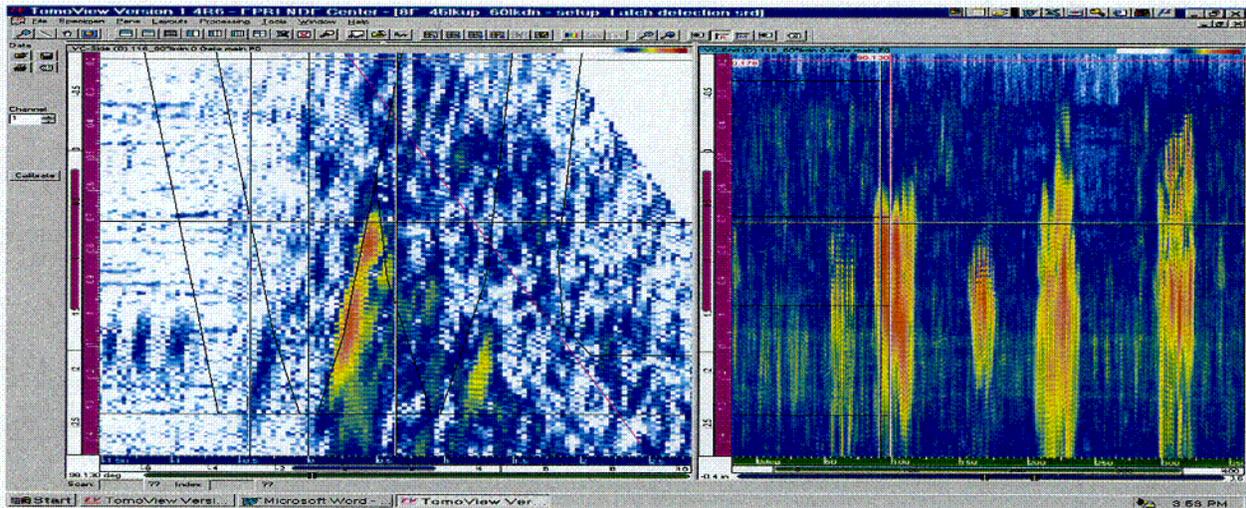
Ultrasonic indication of fatigue crack Flaw B in EPRI mockup. Flaw B is a circumferential crack, 2.7 inches long, and 0.58 inches through-wall. Flaw B is located where the position lines cross in the right hand figure.
